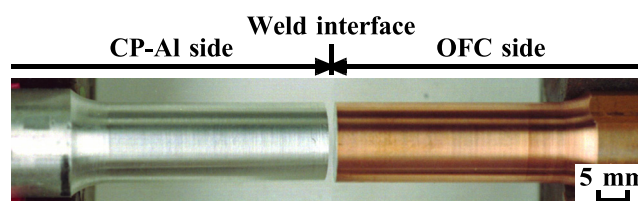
Appearance of tensile tested joint: forge pressure of 30 MPa.
